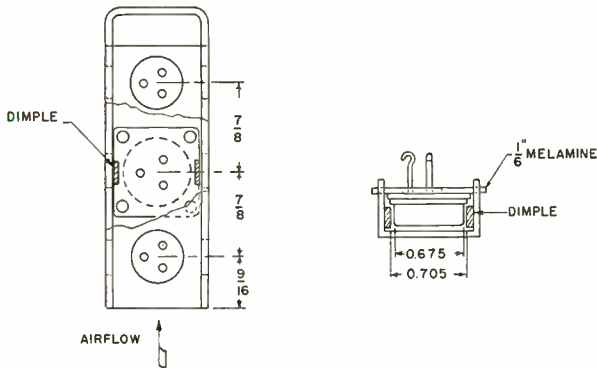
(above): Dimples are made by 8-22 flathead screw, heads filed.
